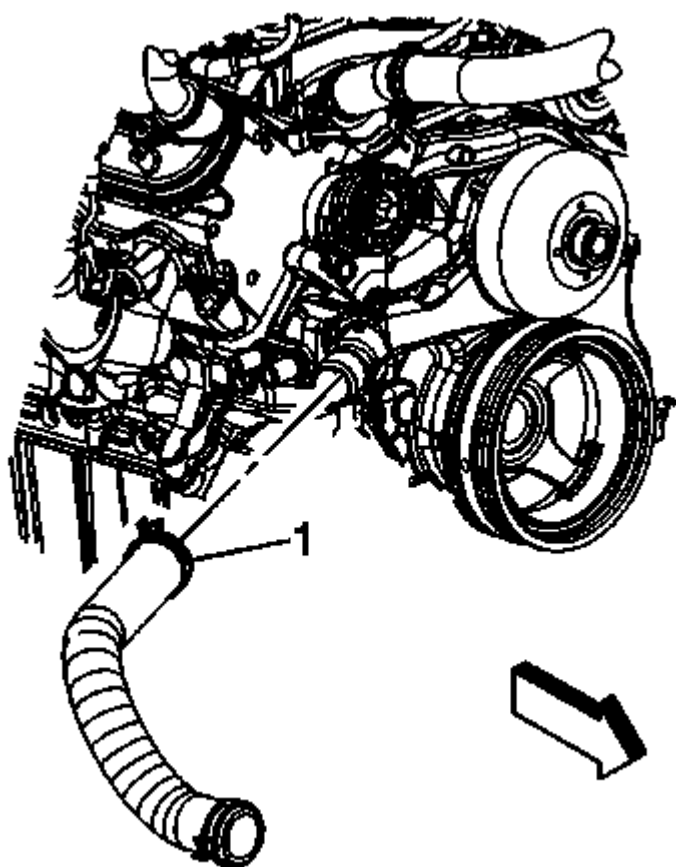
Radiator Outlet Hose Clamp At Water Pump
